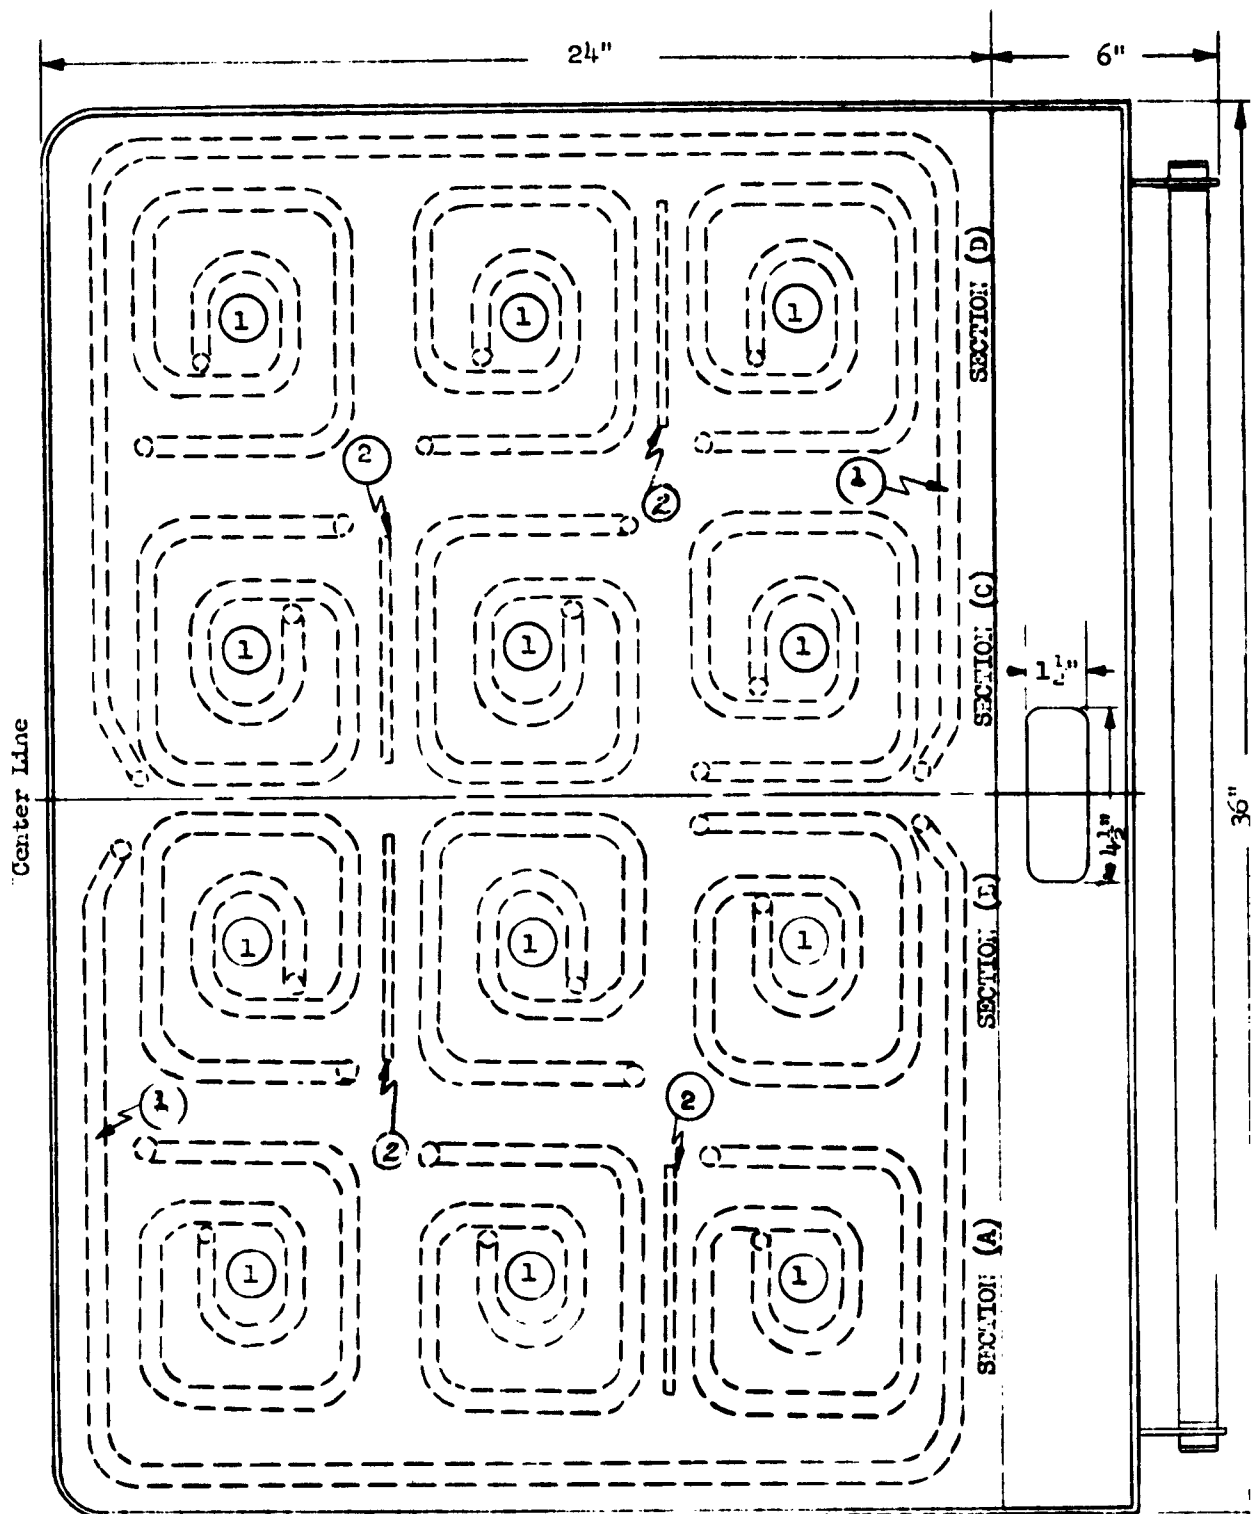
Outline drawing of Griddle "X" showing location of heating elements (1), thermostats (2), and griddle sections (A), (B), (C) and (D).
